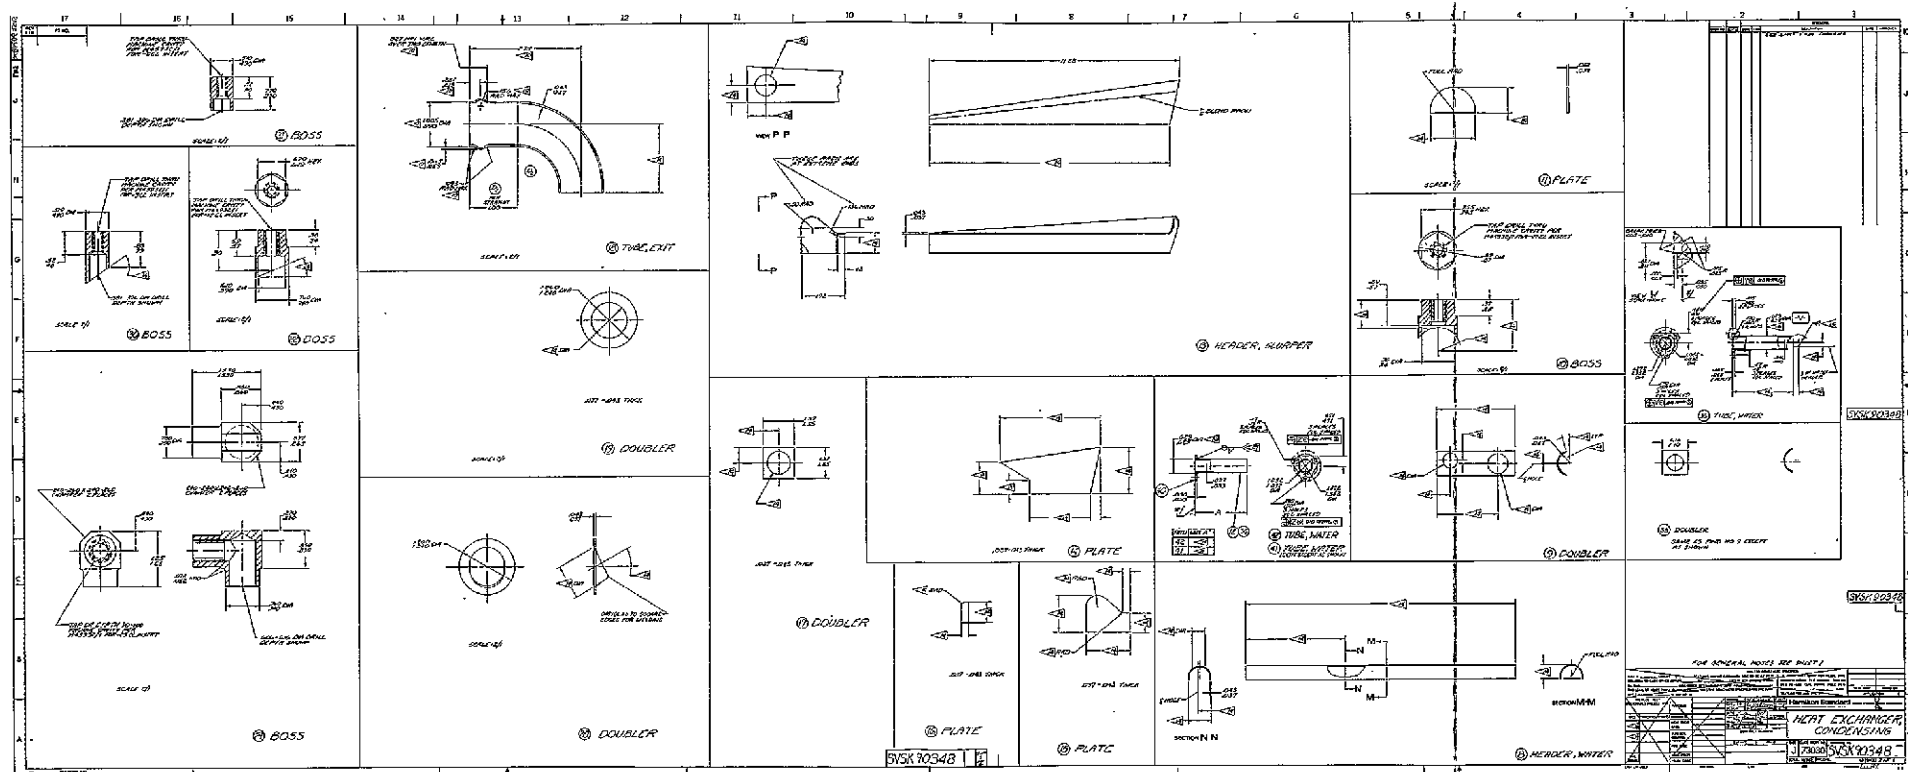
HEAT EXCHANGER DRAWING, SVSK 90348 - CONTINUED
